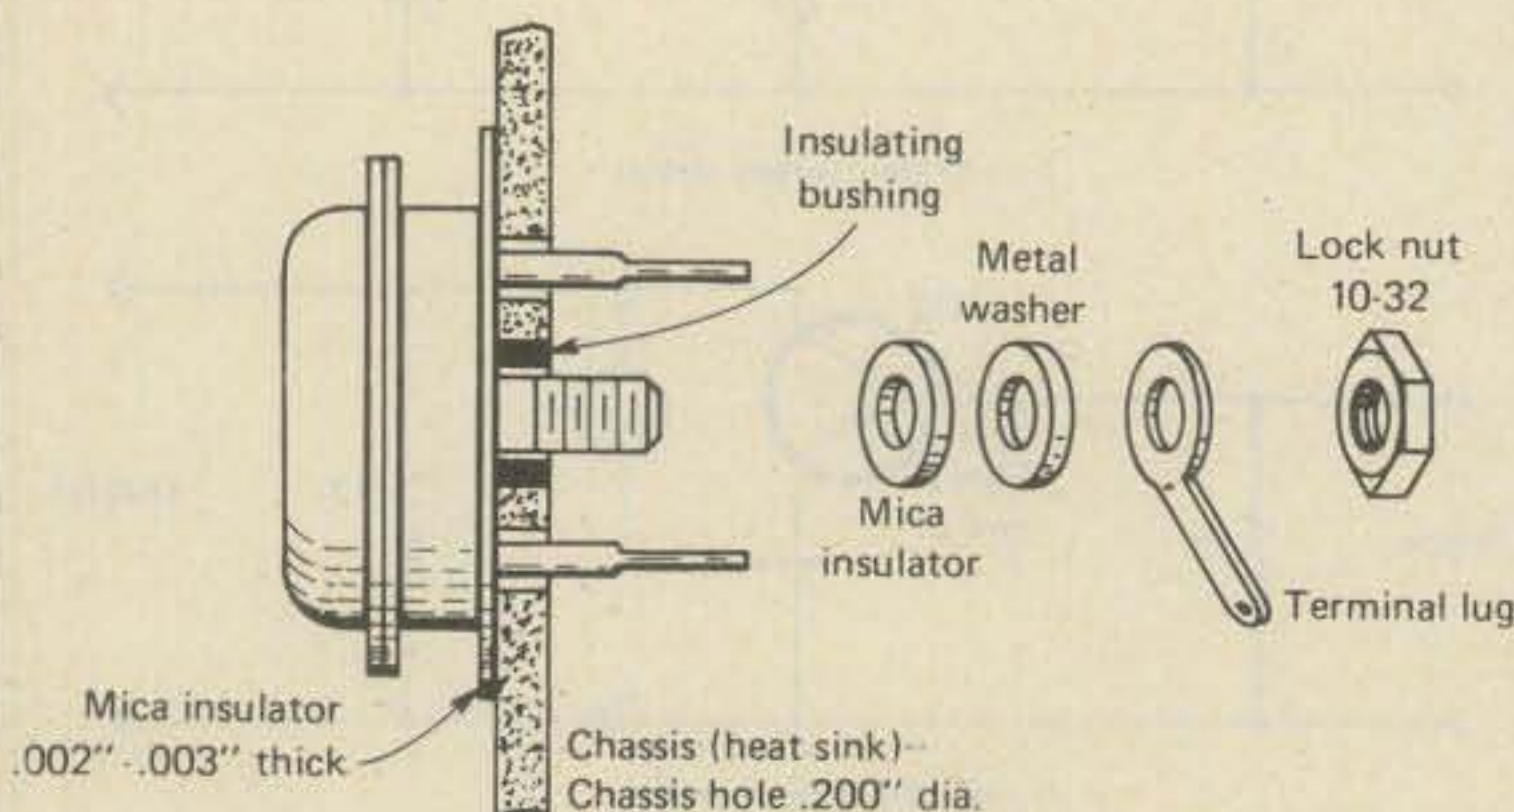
Typical mounting arrangement for power transistor on a heat sink.
